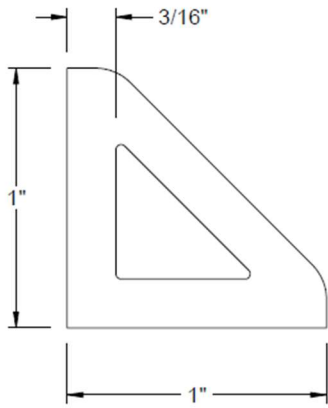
Part 50-0005 Drawing – Single T Slot Gusset
